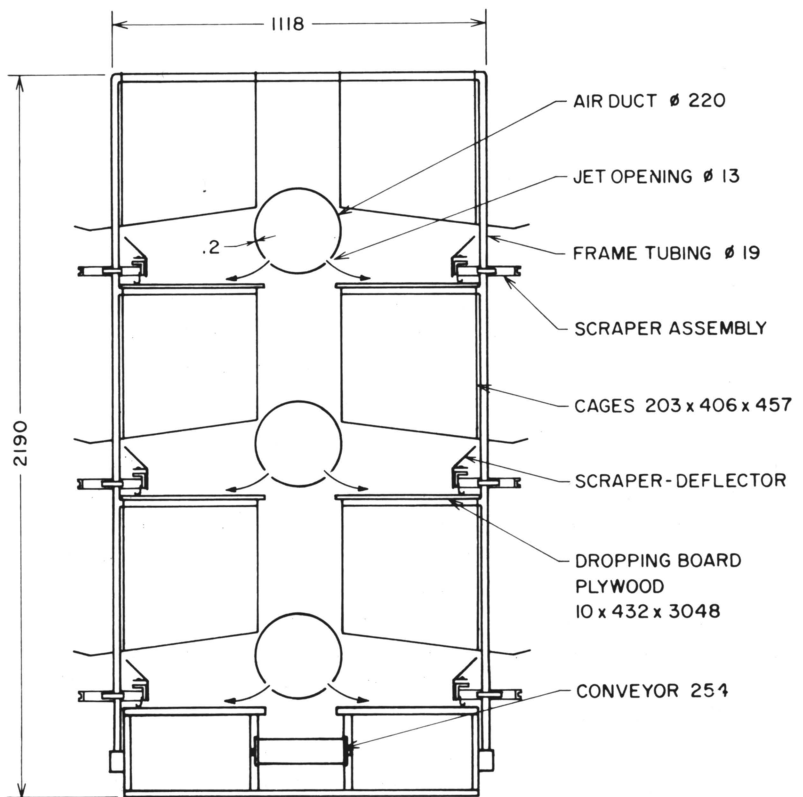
End Elevation of Cages, Air Ducts and Conveyor
